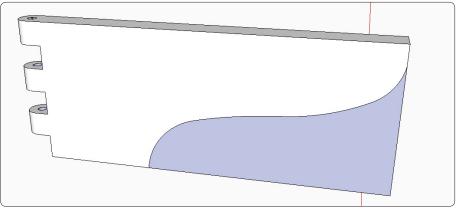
Create the ogee-shaped cutout on the movable half of the hinge.
